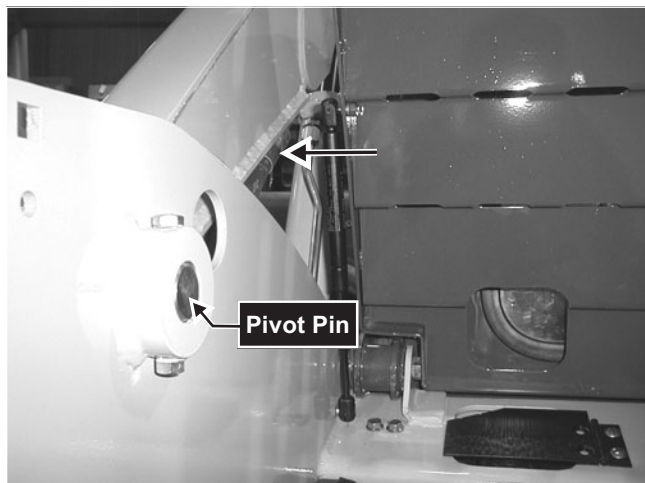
Location underneath liftarm where hydraulic hoses connect to hydraulic tubes.
